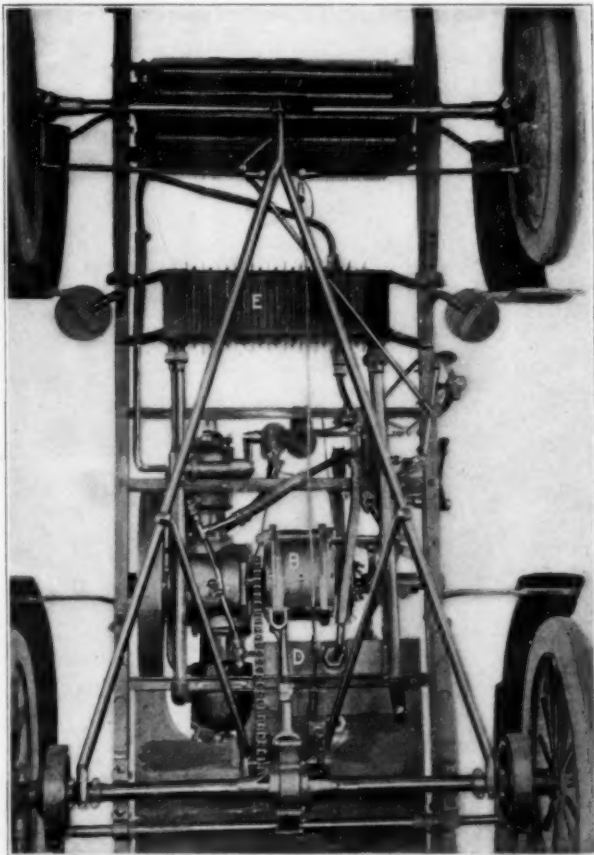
THE "AUTOCAR"—BOTTOM VIEW OF MACHINERY AND RUNNING GEAR.
